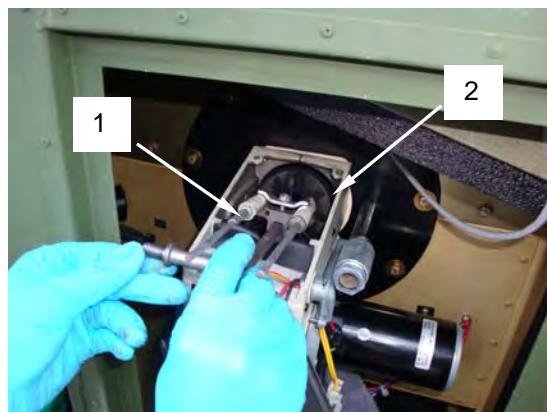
Installing the Nozzle Assembly in Housing Assembly.
